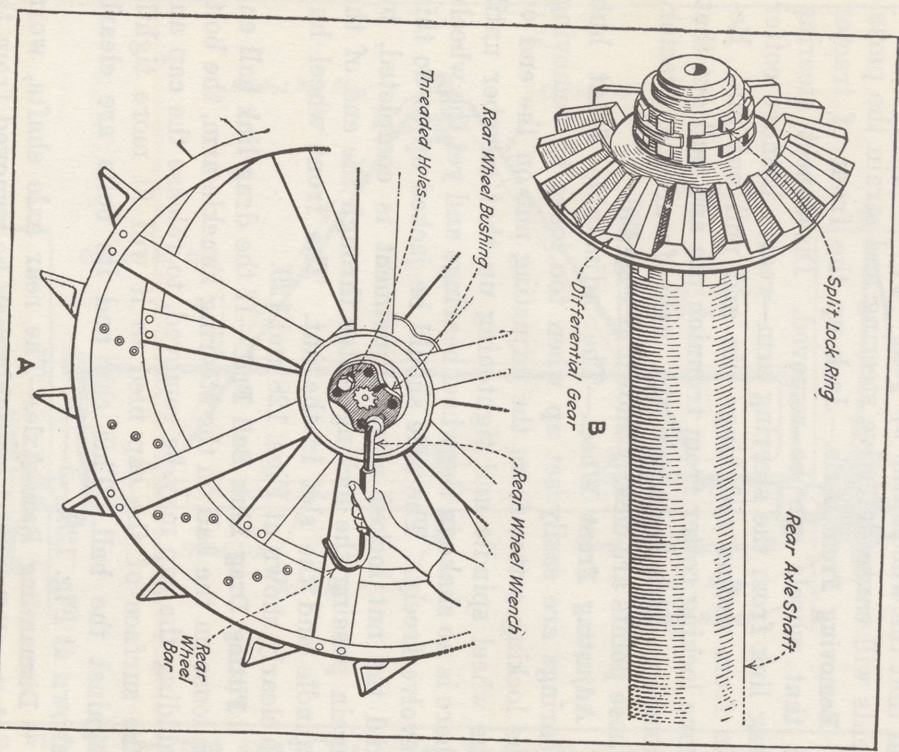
Diagram Showing the Method of Removing Fordson Tractor Rear Wheel at A and Differential Bevel Gear at B. After both housings are removed, the differential and axle shaft assembly may be taken
